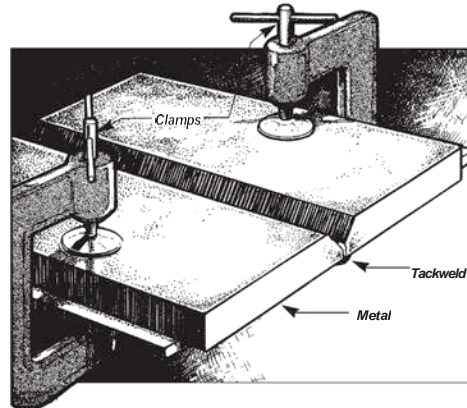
Clamping or tack welding abutt joint
